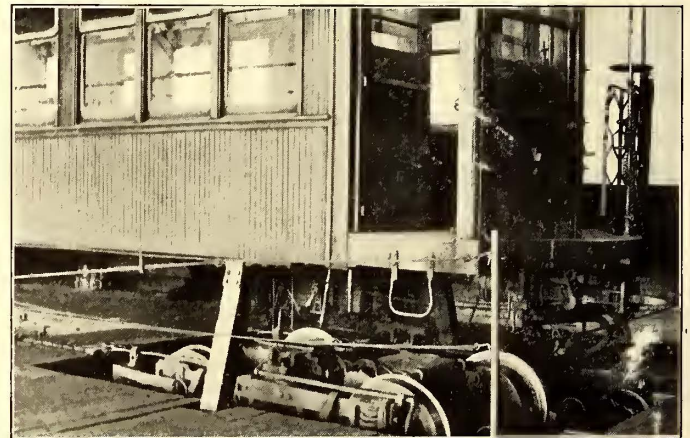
ELEVATOR BEING LOWERED WITH TRUCK ON IT, CAR SUPPORTED OVER OPENING
